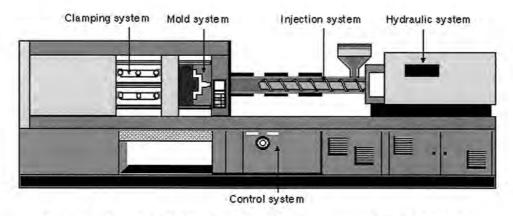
Injection Molding Machine with Component (PMOLDS, 2004)
